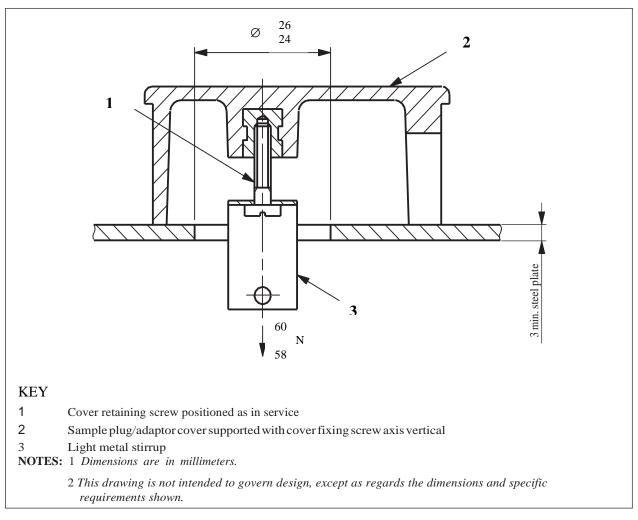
Apparatus for testing plug cover fixing screws (see 12)
